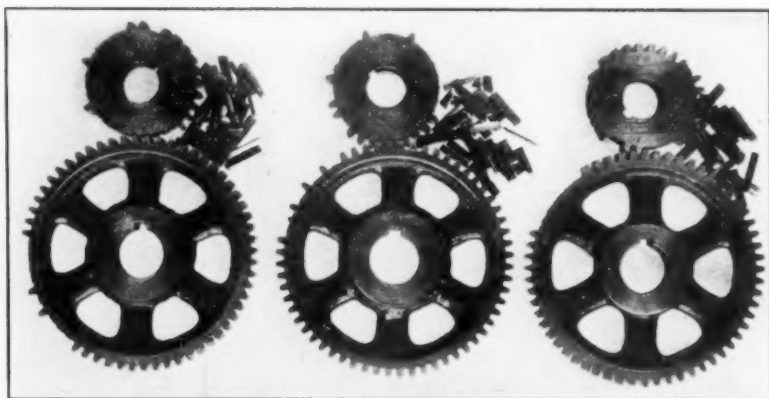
30 TOOTH ENGAGING 60 TOOTH, TESTS 35—37 INCLUSIVE, SERIES 2
